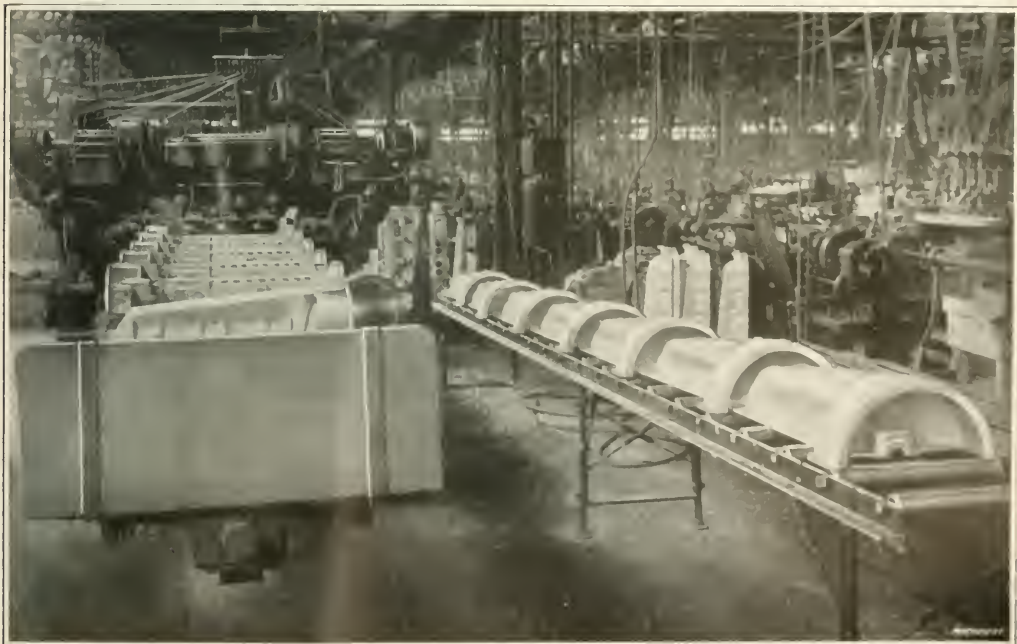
Arrangement of Roller-gravity Conveyors used to transfer Work from Machine to Machine
